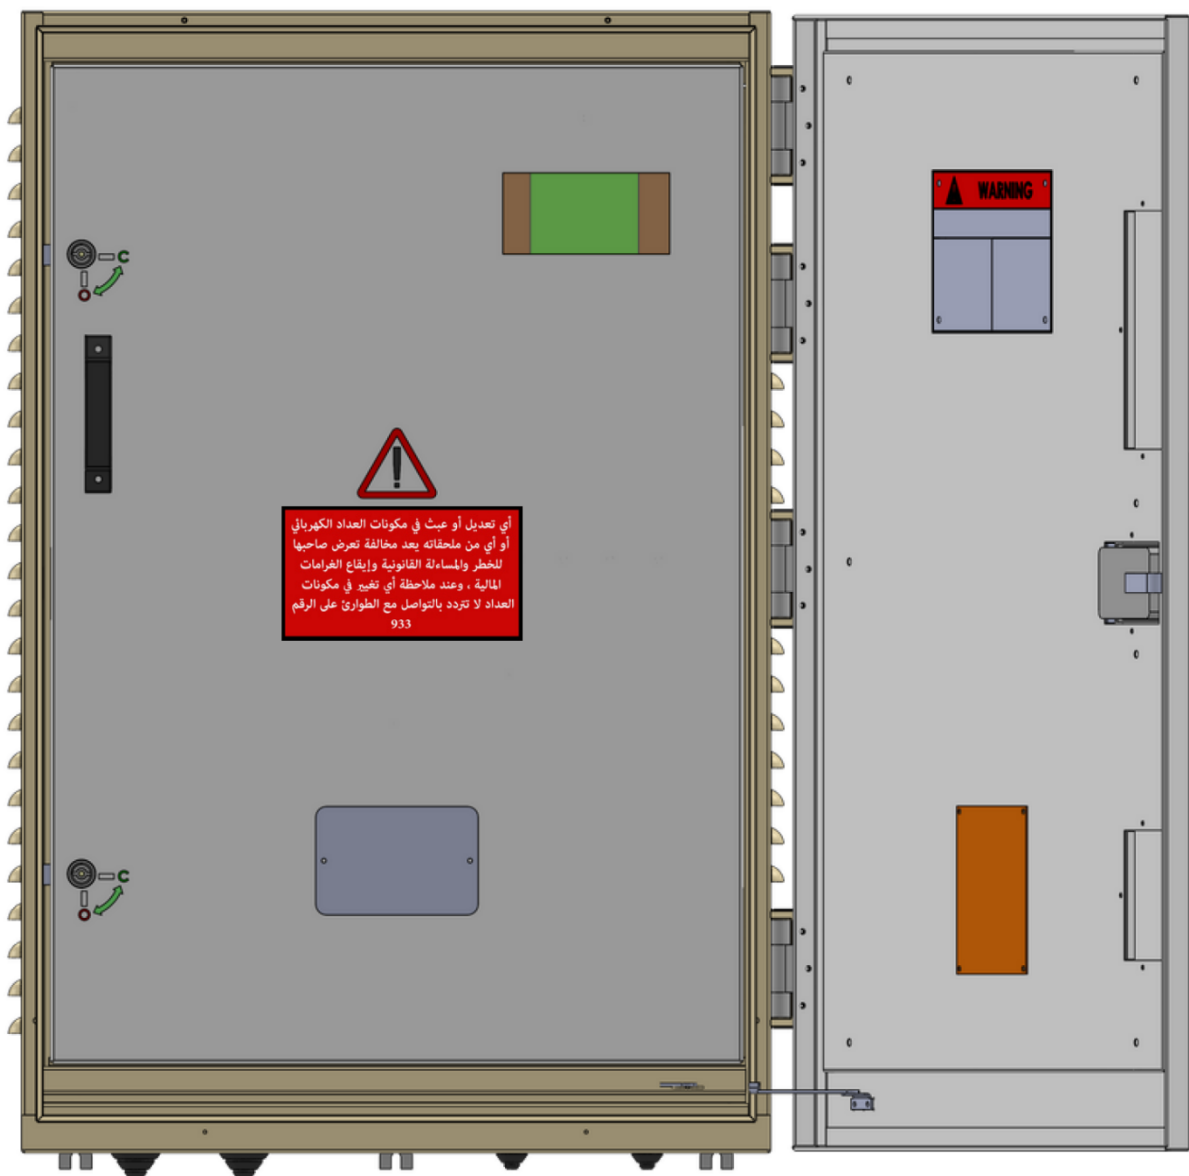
Layout Drawing of 300/400A and 500/600A CT-Meterboxes with Steel Enclosures Showing the Maximum Allowable Dimensions
